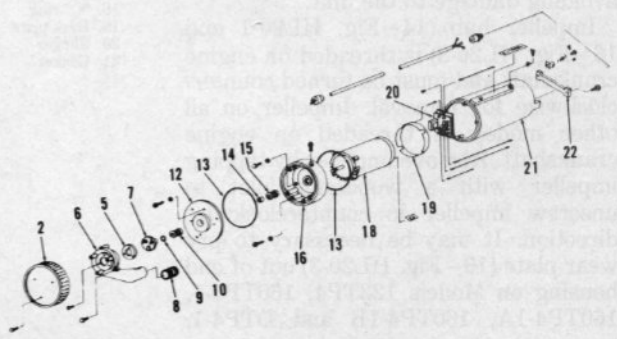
Exploded view of Model SP25L-1. Model SP25-1 is similar but components (13, 15, 16 and 21) are not used.
